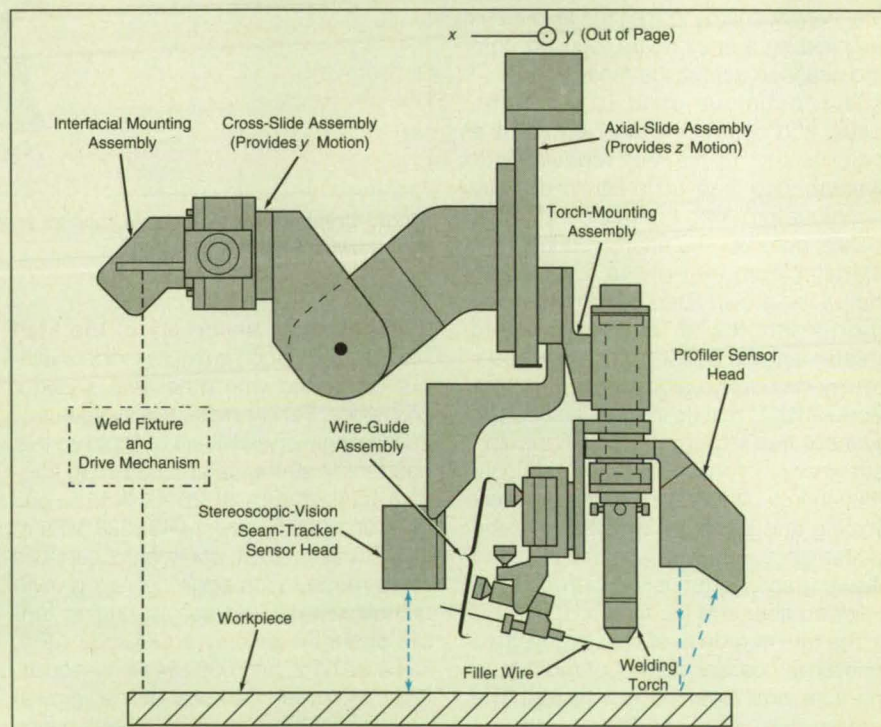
This Welding Apparatus operates under electronic control by the system of Figure 2. Figure 2. The Welding Analysis and Control System includes optoelectronic sensors and data processors that provide feedback control of the welding process plus data on the quality of the weld.
